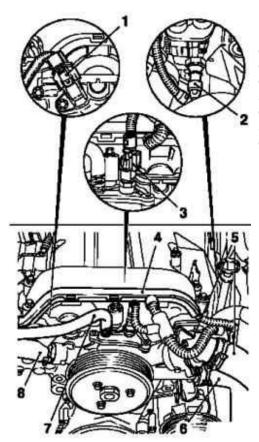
Removing the coolant hoses and wiring of sensors: 1 - connectors wiring harnesses camshaft sensor, 2 - wiring harness connector of the oil pressure sensor, 3 - the wiring harness connector coolant temperature sensor, 4 - wiring harnesses, 5 - coolant hose, 6, 7, 8 - coolant hoses
